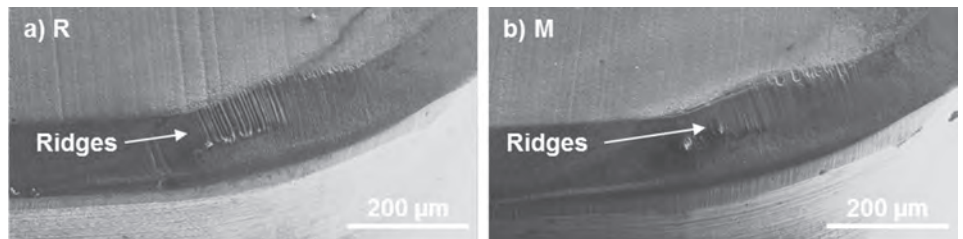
SEM micrographs of the PCBN edges after the cutting tests at $v_c = 166$ m/min. interrupted at (a) 41 parts (7.5 min.) and (b) 86 parts (16 min.); the edges were etched prior to imaging
